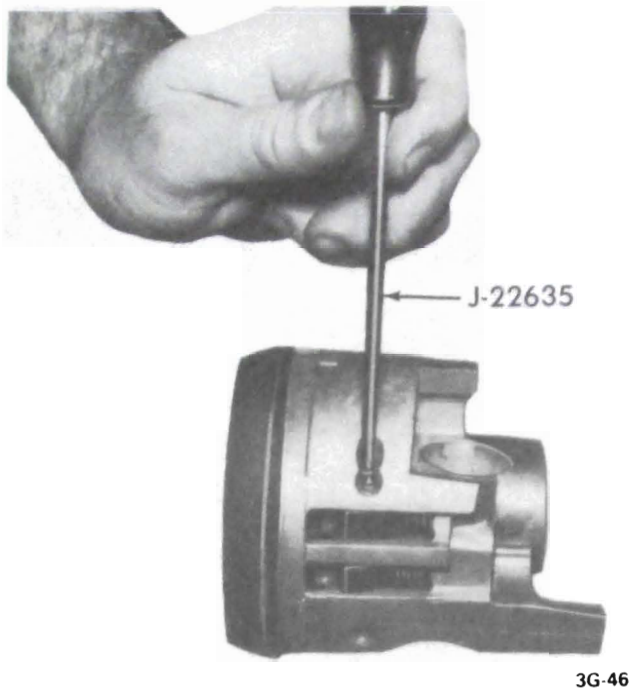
G-46 - Removing Lock Shoe Pivot Pin
